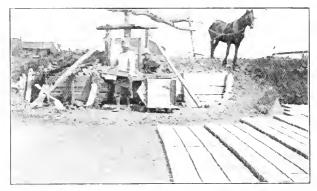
Slop-brick plant in operation, Crediton. The brick are dried in the open yard as shown in the photo.
